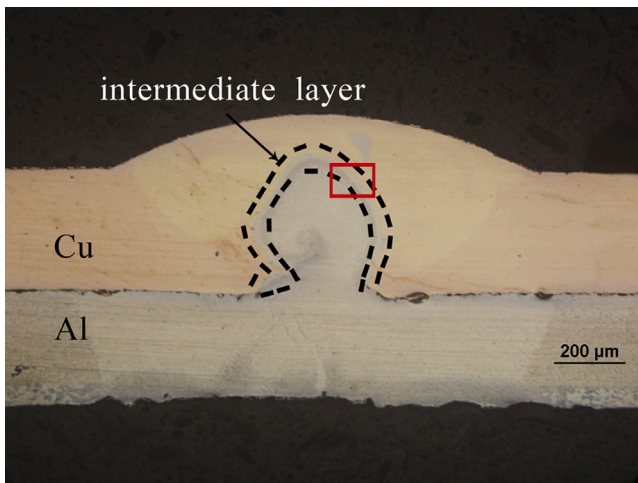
Micrograph of weld cross-section with a laser power of 1650 W and a welding speed of 95 mm/s [103].
